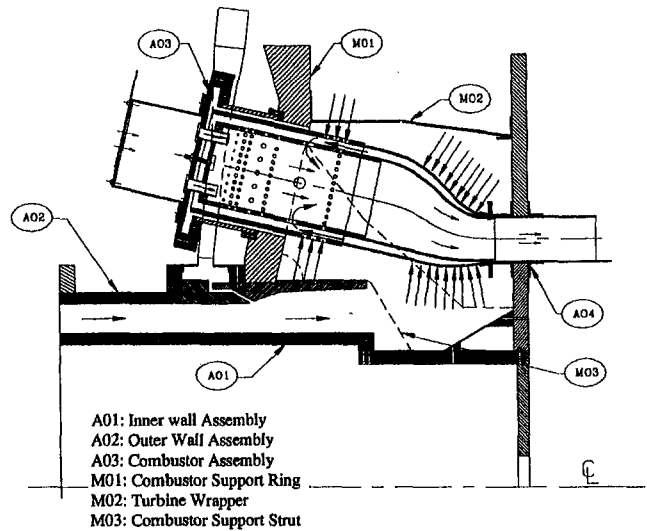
Cross-sectional view of the test model (prediffuser air extraction design is shown)
